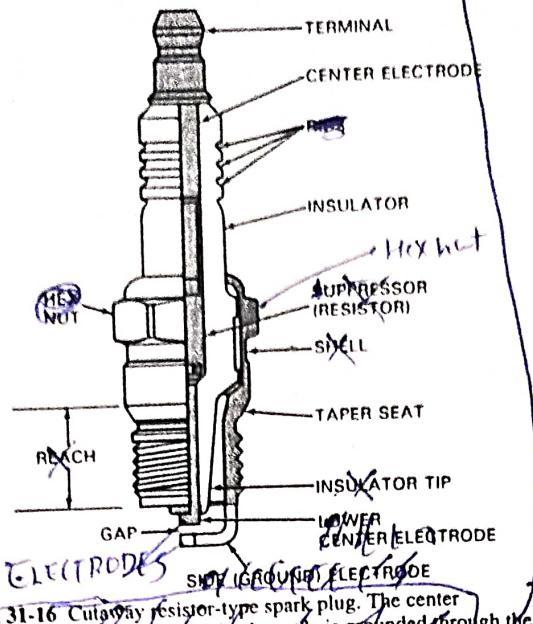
Cutaway resistor-type spark plug. The center electrode is insulated. The side electrode is grounded through the engine. (AC Spark Plug Division of General Motors Corporation)
